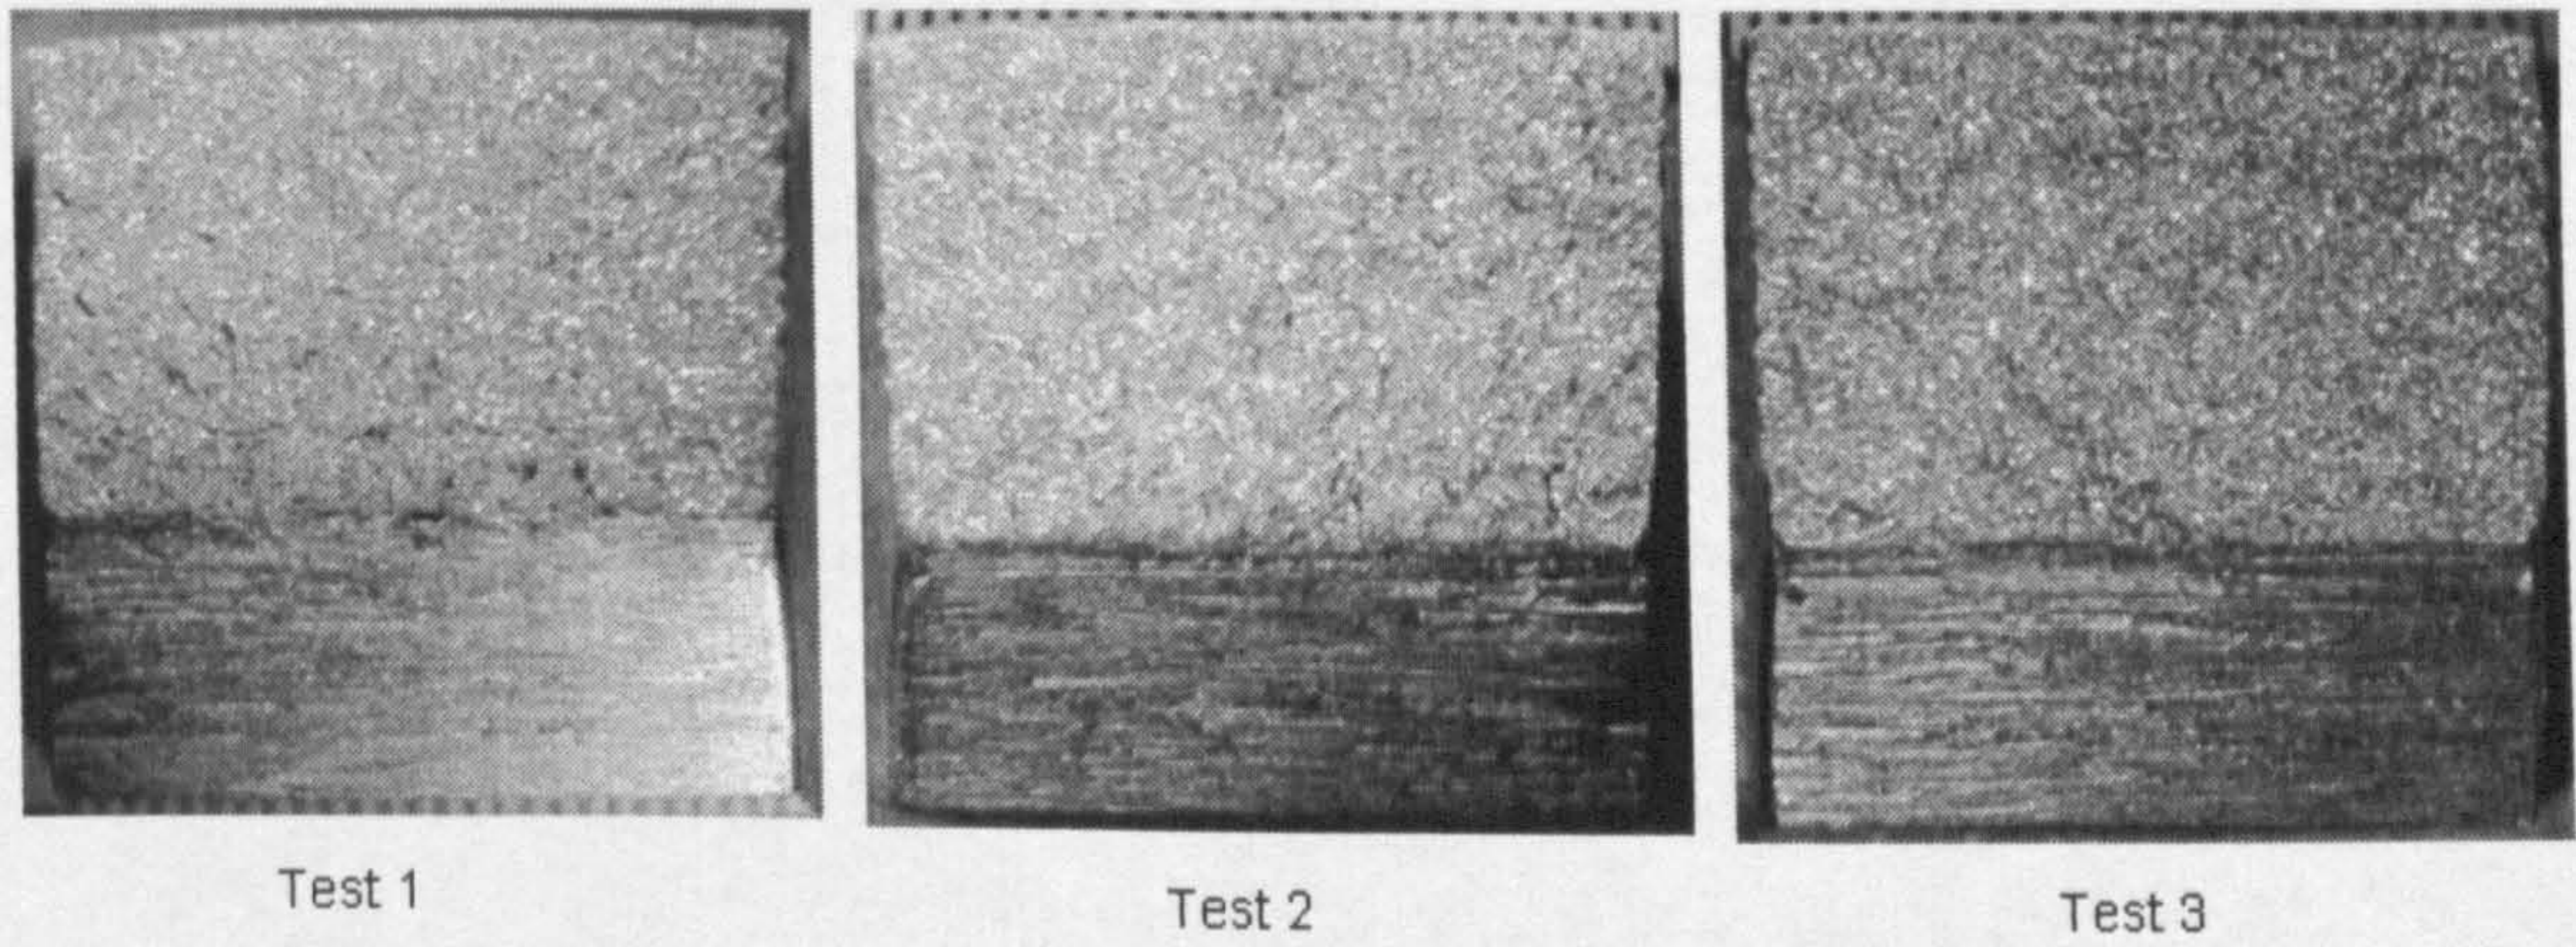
Fracture surfaces of 4PB specimens tested at -60°C .
